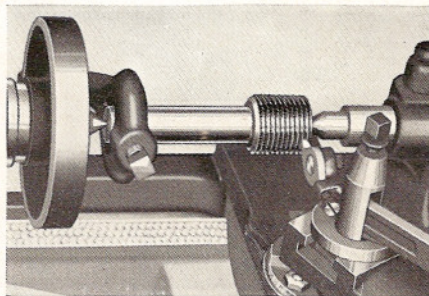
Cutting a Screw Thread on a Tap in the 9-inch Toolmaker Lathe.
